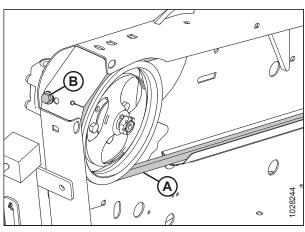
Knife Drive Belt and Pulley – Double-Knife Header, View from Rear
